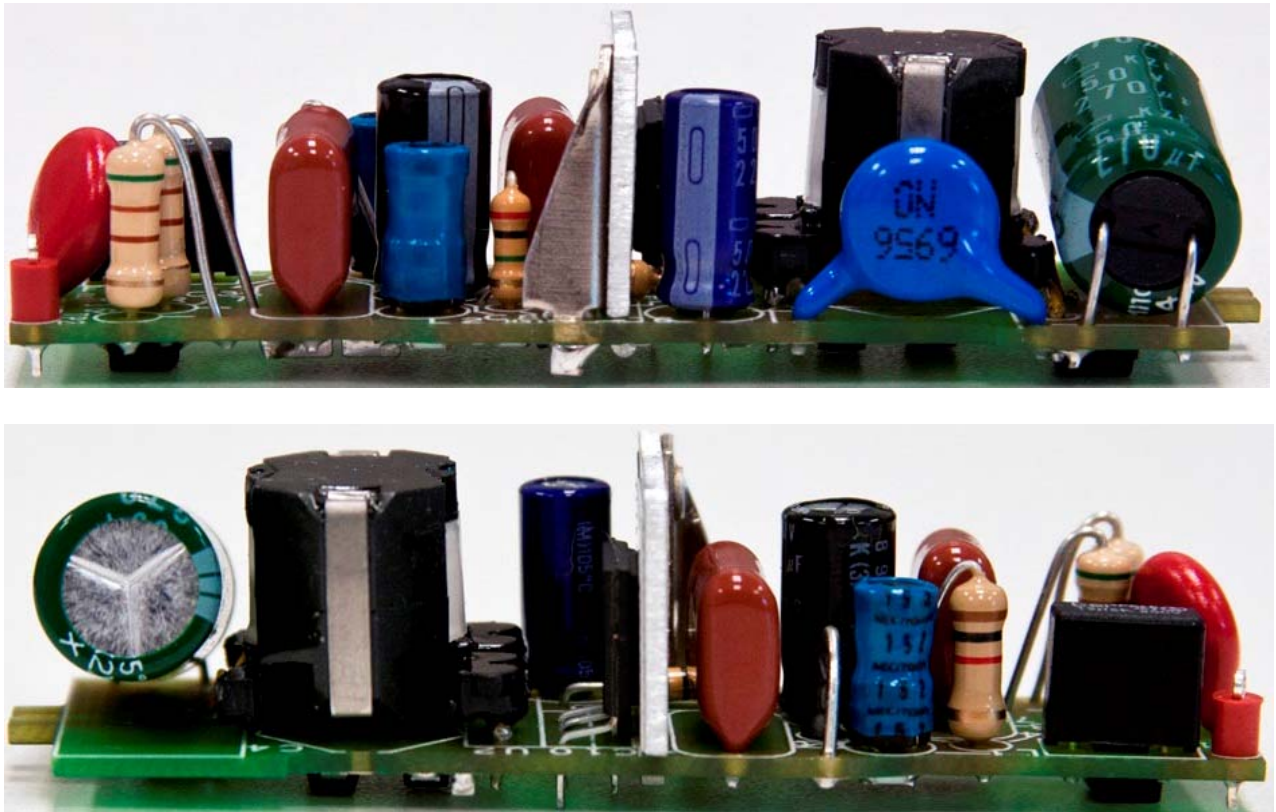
Populated Circuit Board Photograph Single Sided PCB (Side Views).
